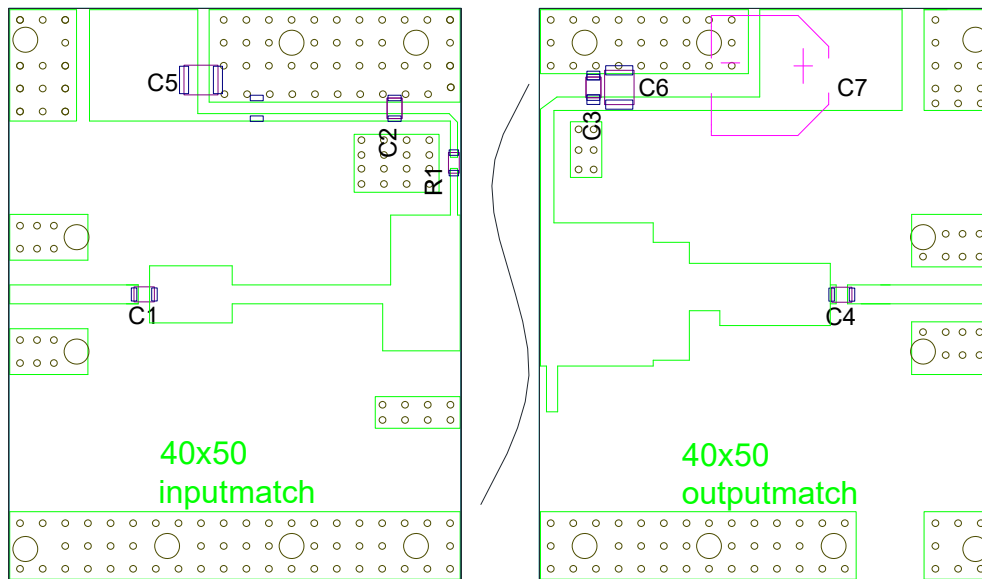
Test Circuit Component Layout (3400-3600MHz)
